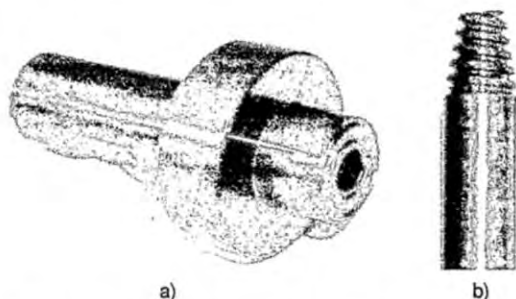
Welding tool: a) tool shoulder with machined spiral flute; b) tapered threaded pin
